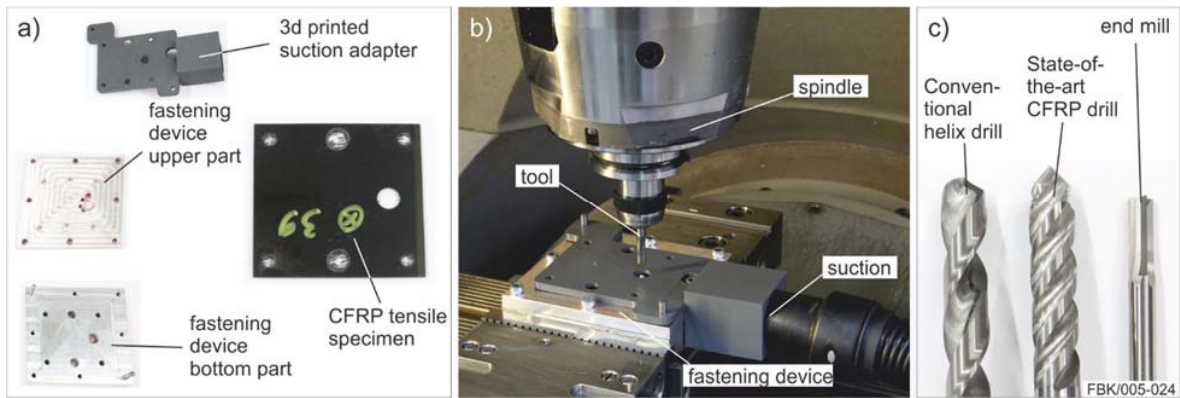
a) Details fastening device; b) fastening device attached on 5-axis machining center; c) applied tools.
